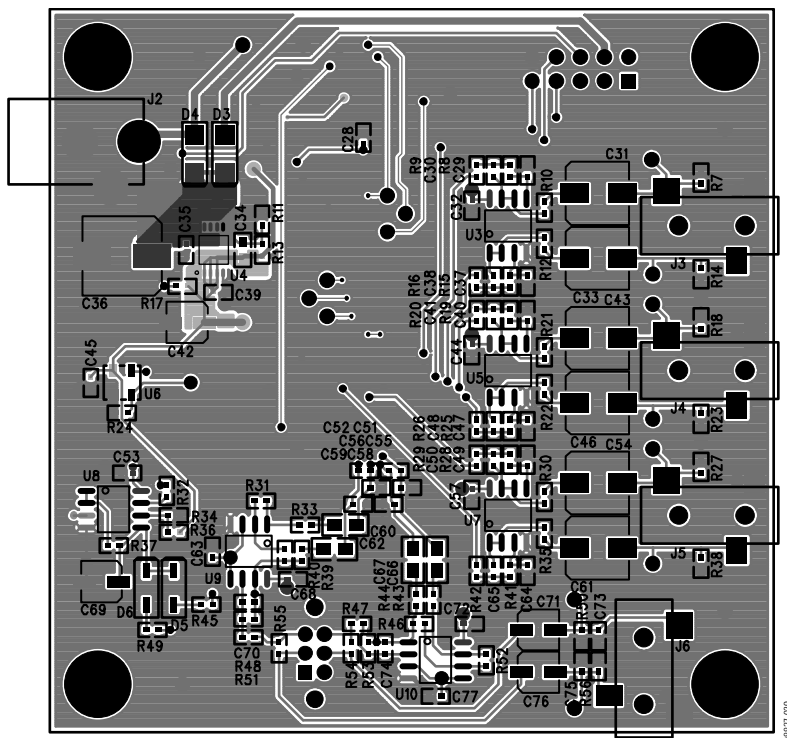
Board Layout, Page 3—Bottom Layout and Screen
